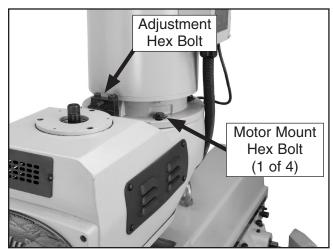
Motor mount and drive belt tension adjustment hex bolts.
